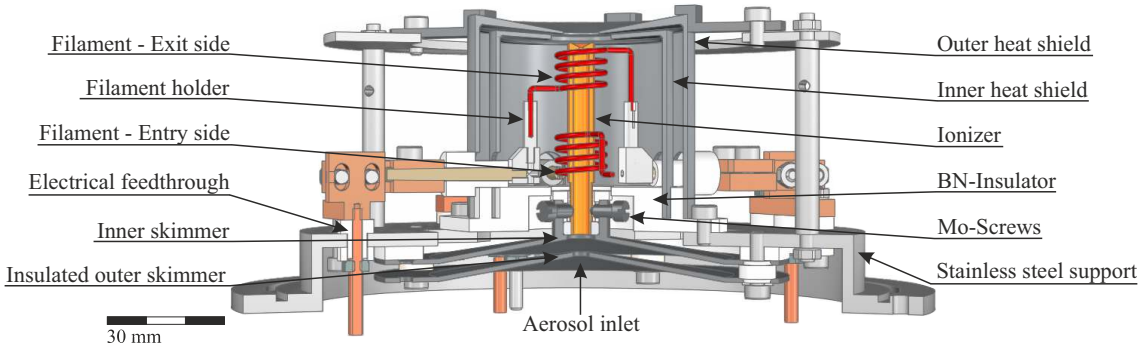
Technical drawing of the redesigned surface ion source with labeled central parts.
